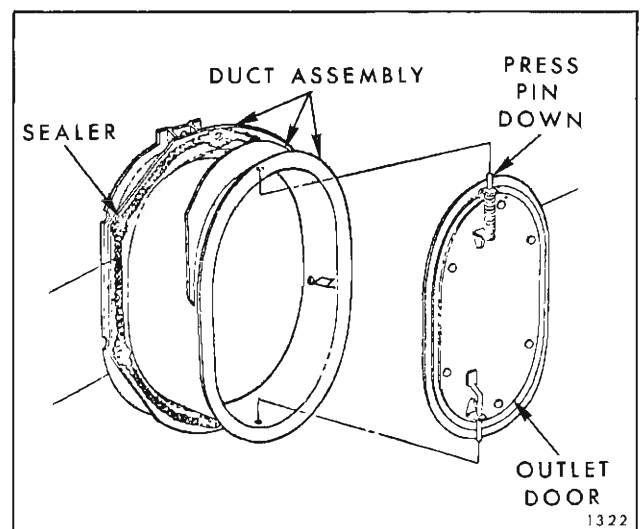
C14—Shroud Side Air Outlet Duct Assembly and Sealing
